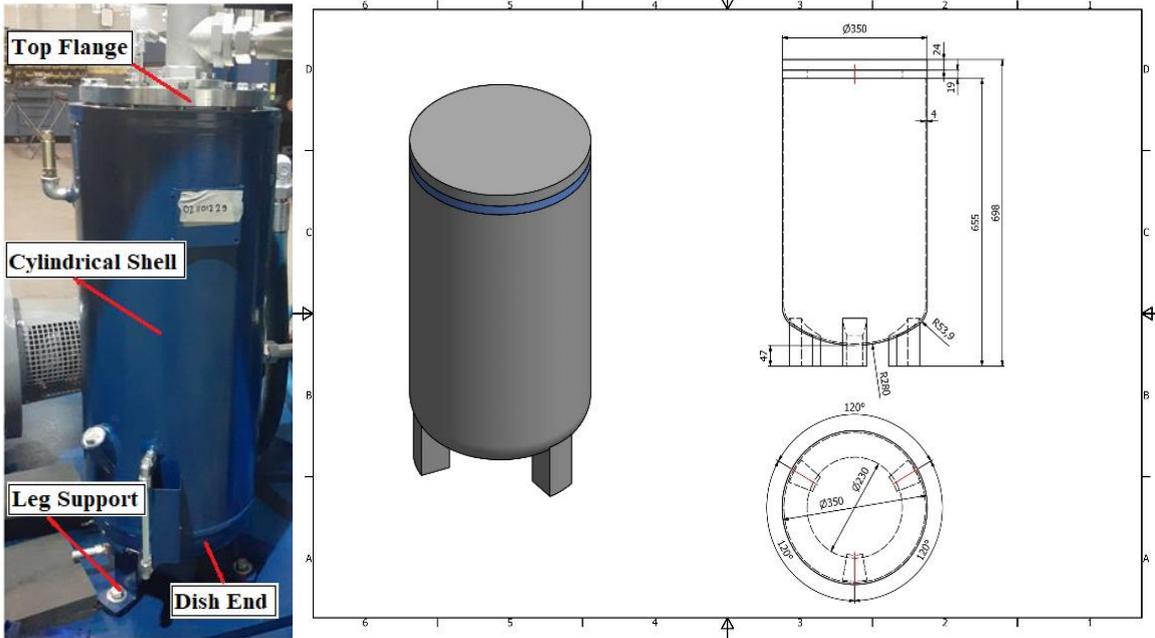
Figure of in-house developed oil separator pressure vessel components and technical details
